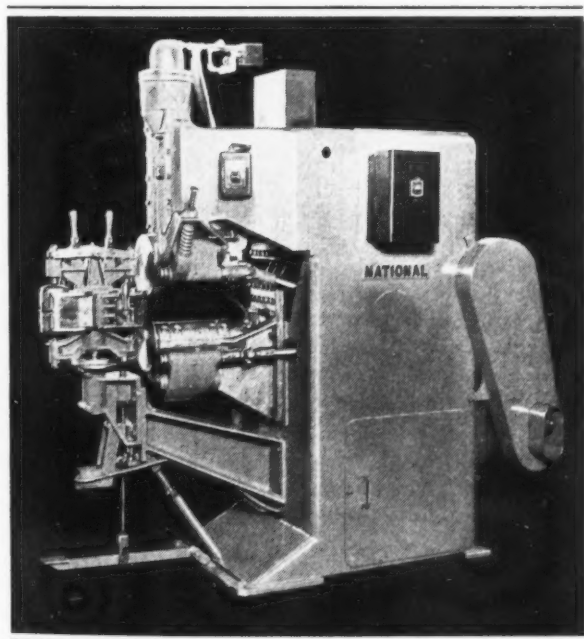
Seam Welding Machine for Assembling Parts Welded on the Machine Shown in Fig. 1
